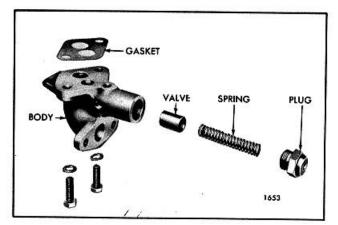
Lubricating Oil Pressure Regulator Details and Relative Location of Parts.
